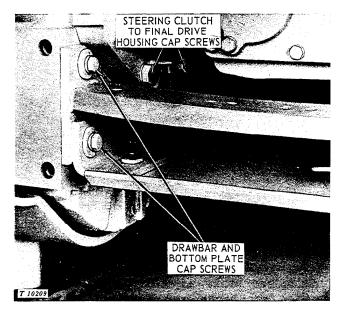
Removing Drawbar and Steering Clutch Housing Attaching Cap Screws
